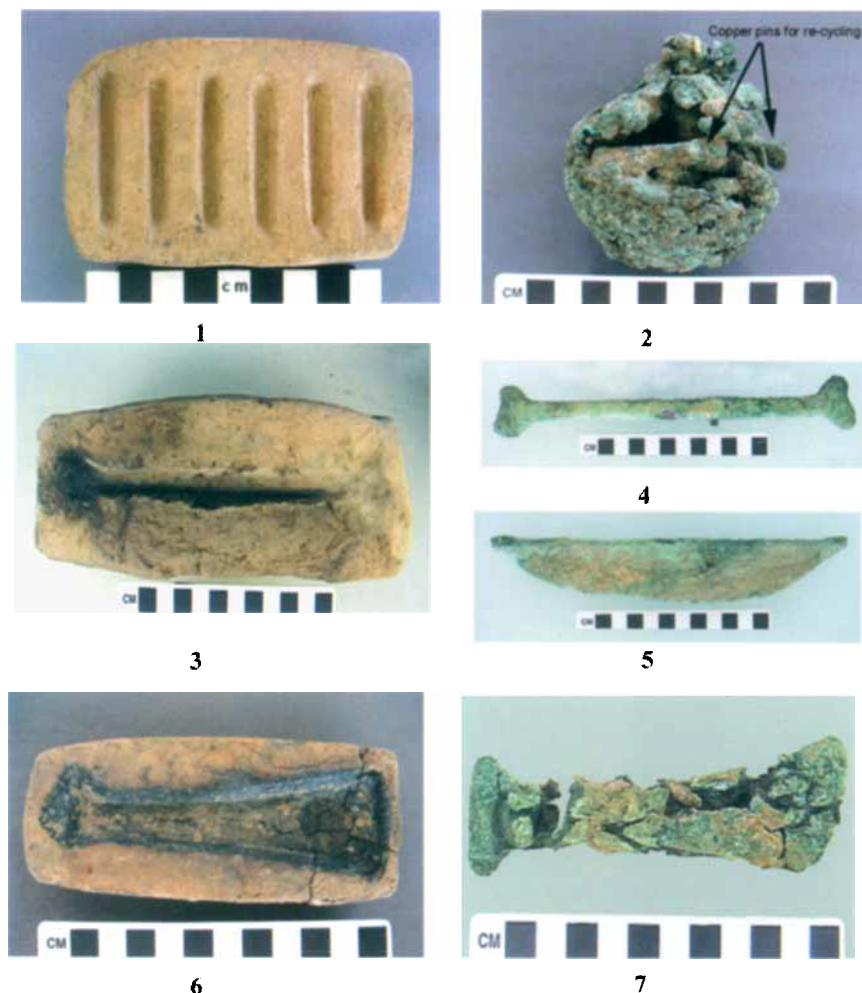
Casting moulds, melted copper from crucible and metal tools from KHI.
